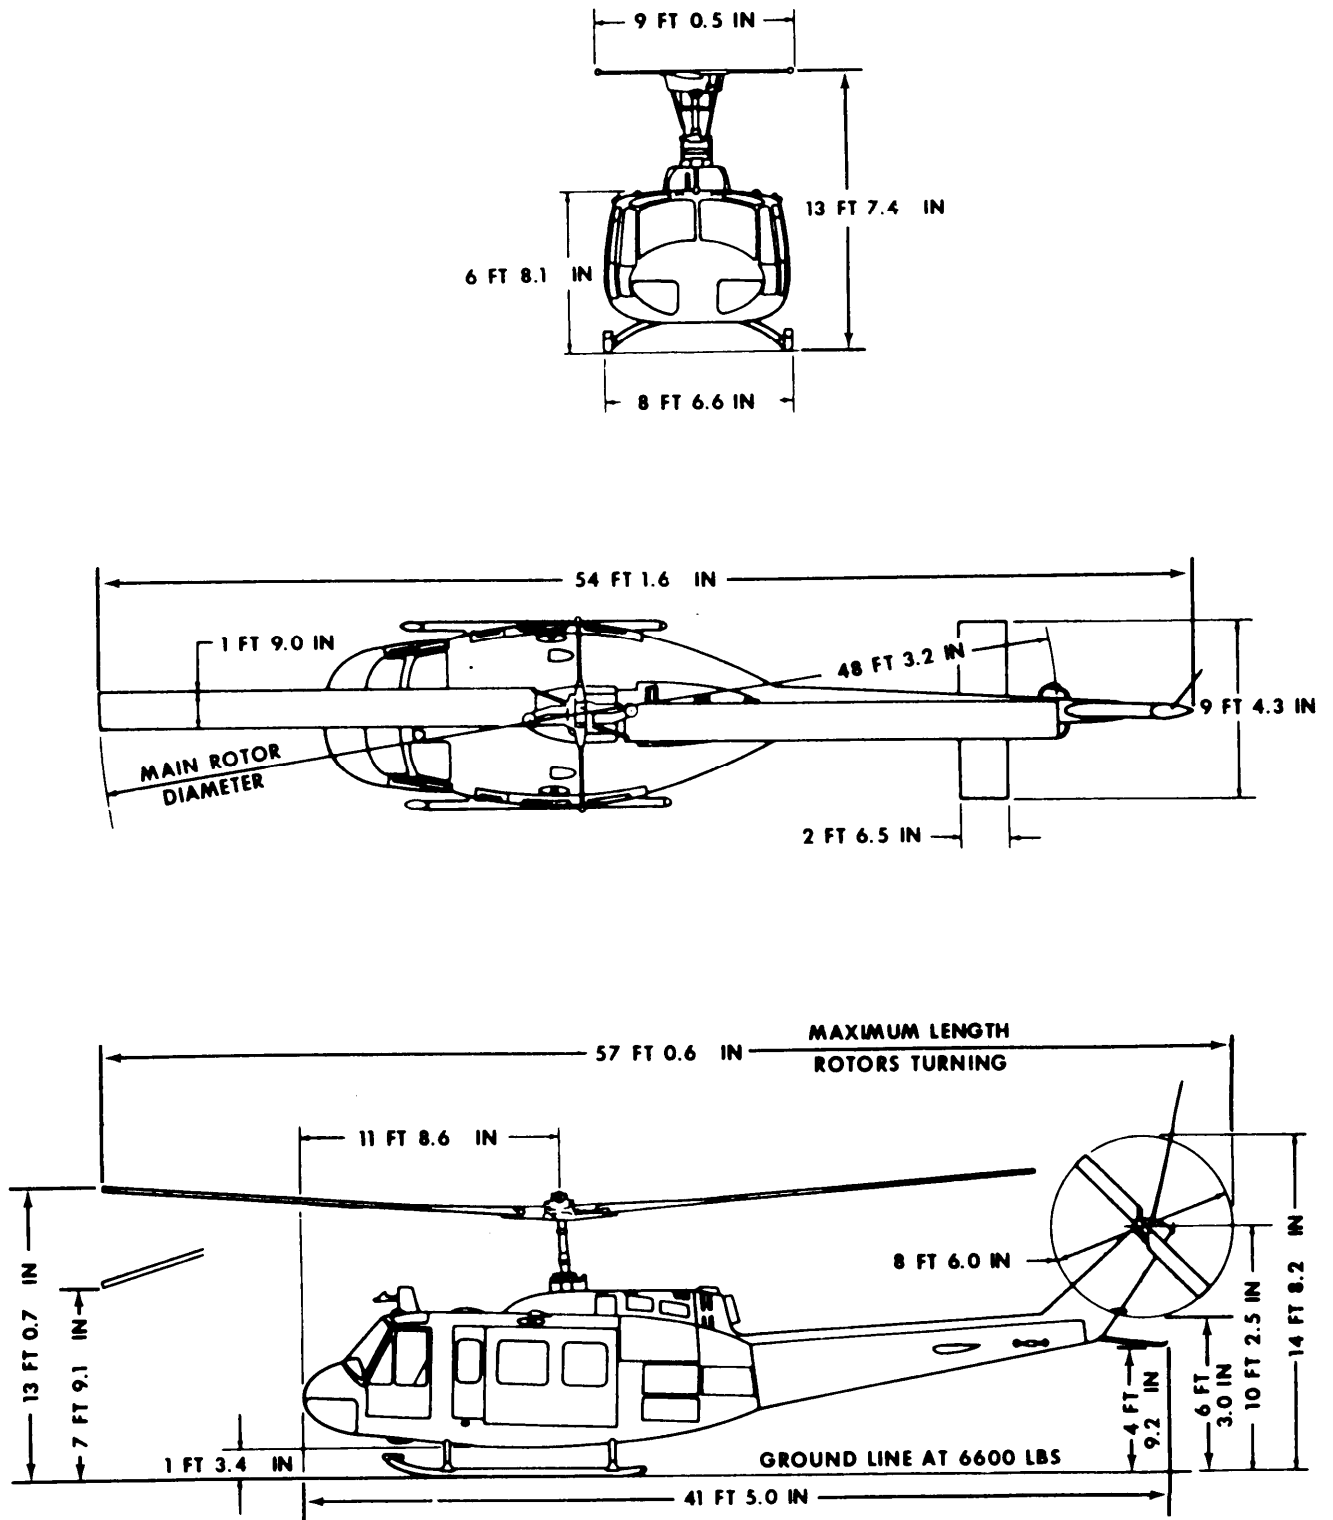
Principal dimensions, UH-1H (Front, top, and side views).
